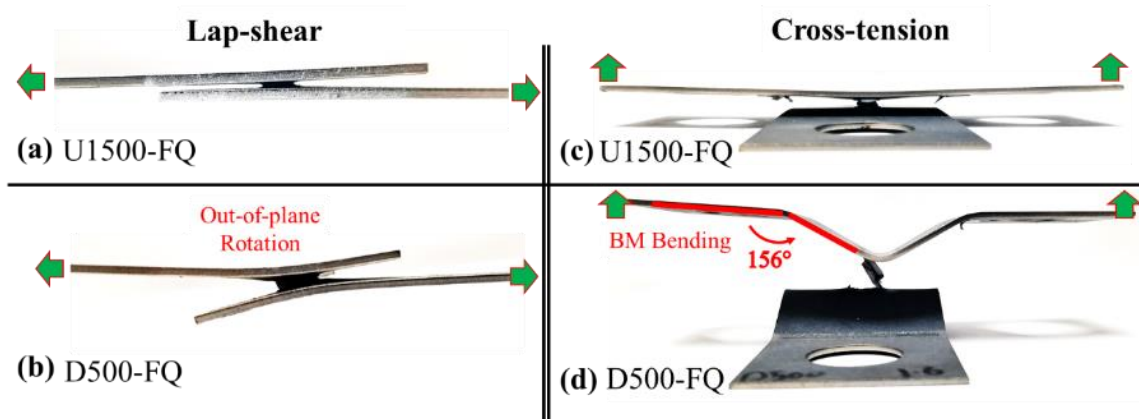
Macroscopic images of failed samples under shear and normal loads for U1500-FQ and D500-FQ spot welds.
